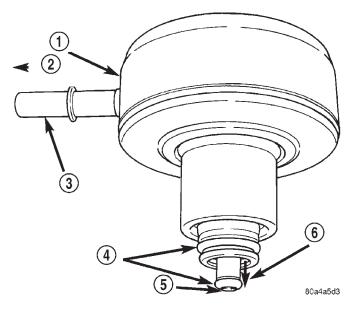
Fuel Filter/Fuel Pressure Regulator
